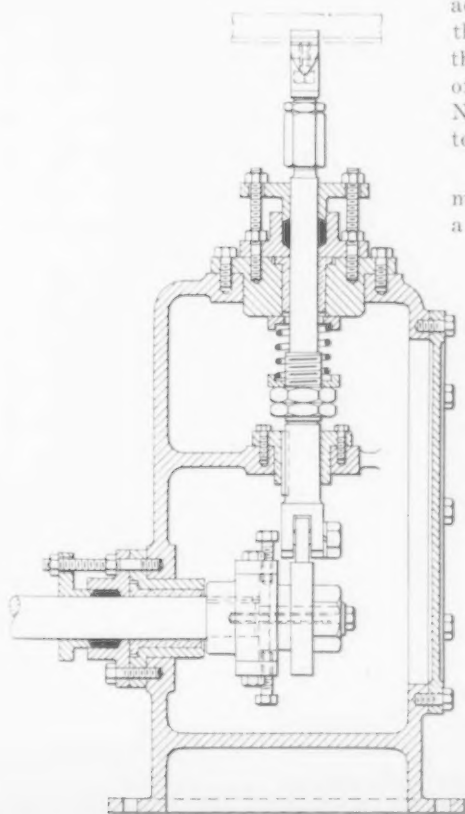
Enlarged view of the core deflecting mechanism. The knife at its center has a harmonic motion toward and away from the arbor, forming a crooked core on a straight arbor.
